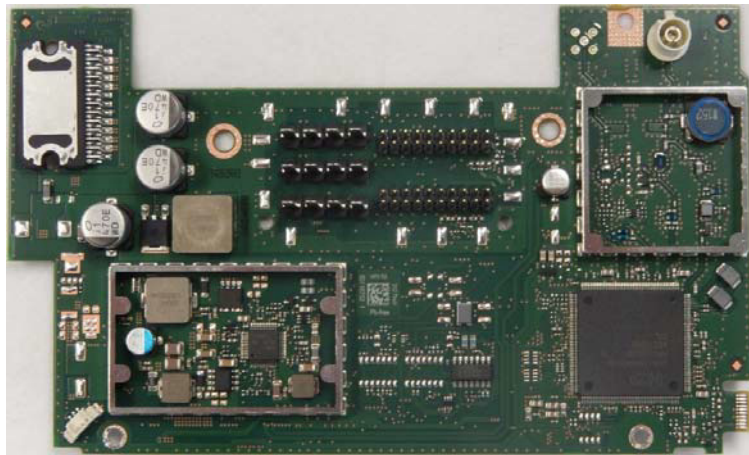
VP2 Refresh FP PowerRadio board PCB Top
